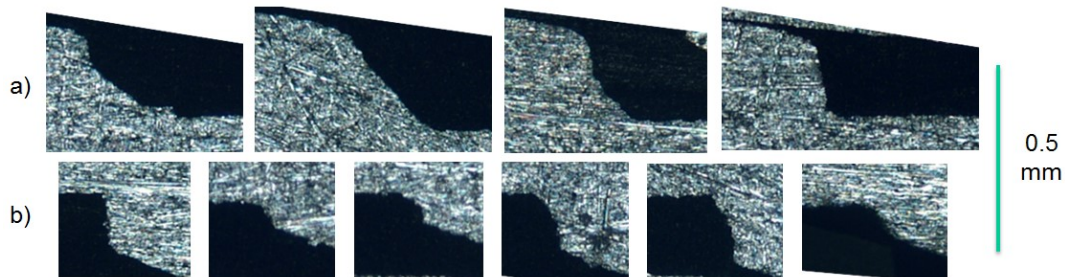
Multiple microscopic view of upper and lower trim tool edge imprints in 0.9mm blank in production blanking die, showing variation in tool sharpness. (a) Upper trim tool edge imprints. (b) Lower trim tool edge imprints.
